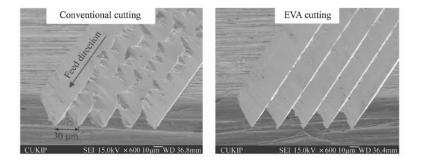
Image of micro v-grooves machined by conventional cutting (left) and vibration assisted cutting (right) [12]
